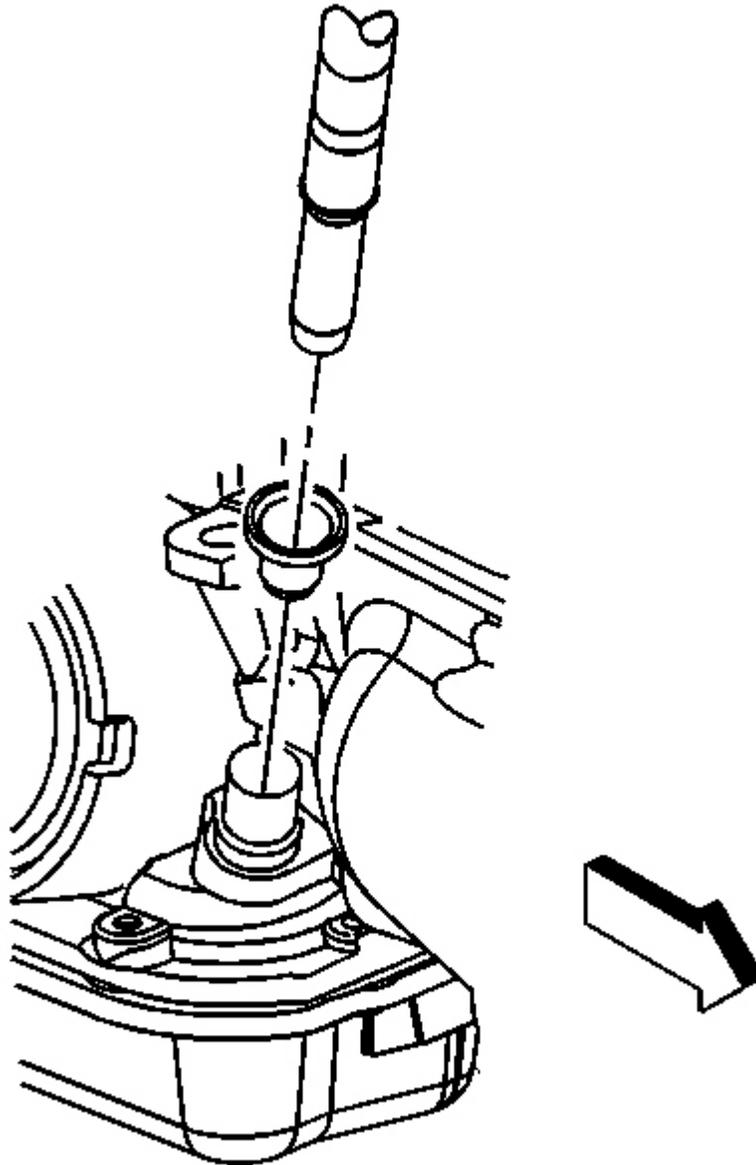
Identifying Oil Level Indicator Tube (Without RPO HP2)
